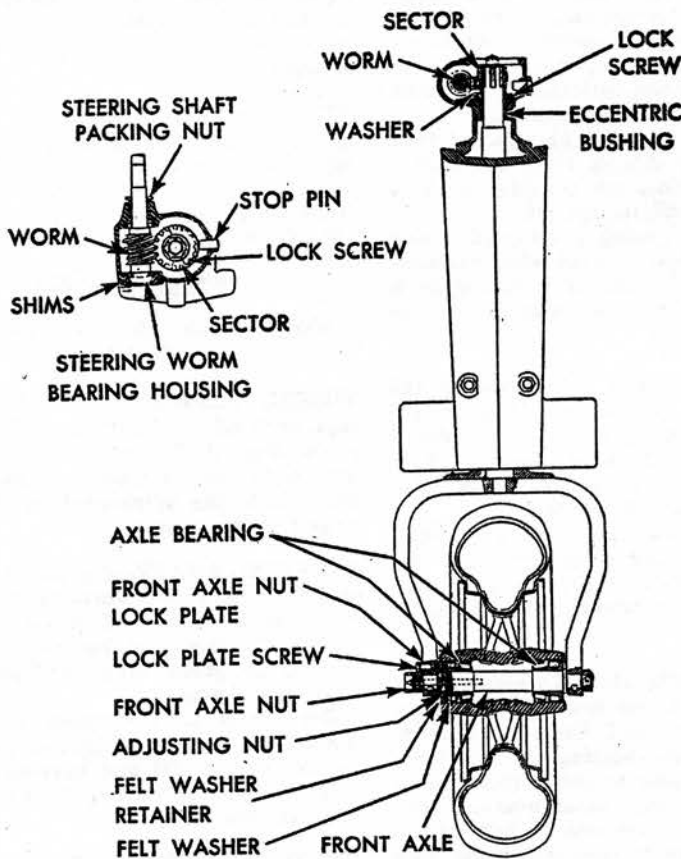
Front suspension and steering gear. Typical of Series A, B, G, H with single front wheel
